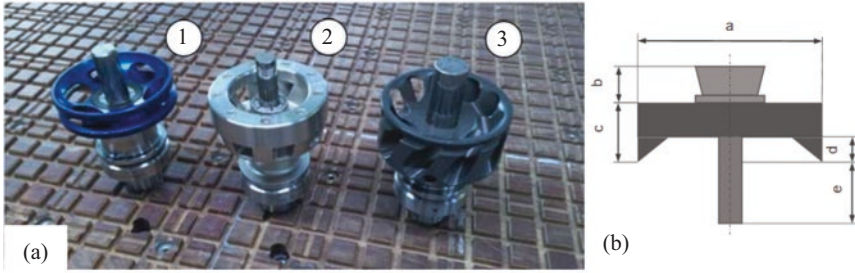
Different chip fans (a): chip fan 1, chip fan 2, chip fan 3; Geometrical dimensions (b).
